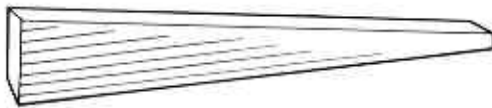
Flywheel Key Extractor Taper Drift PJZ and PJZW
